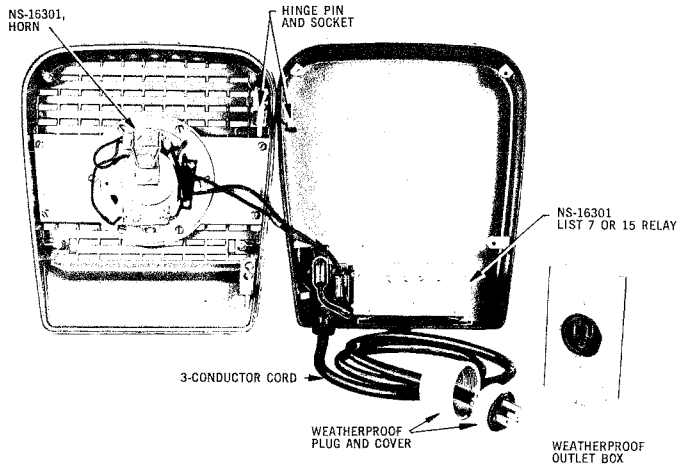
Complete Assembly, Outdoor Dual Potential, Horn
